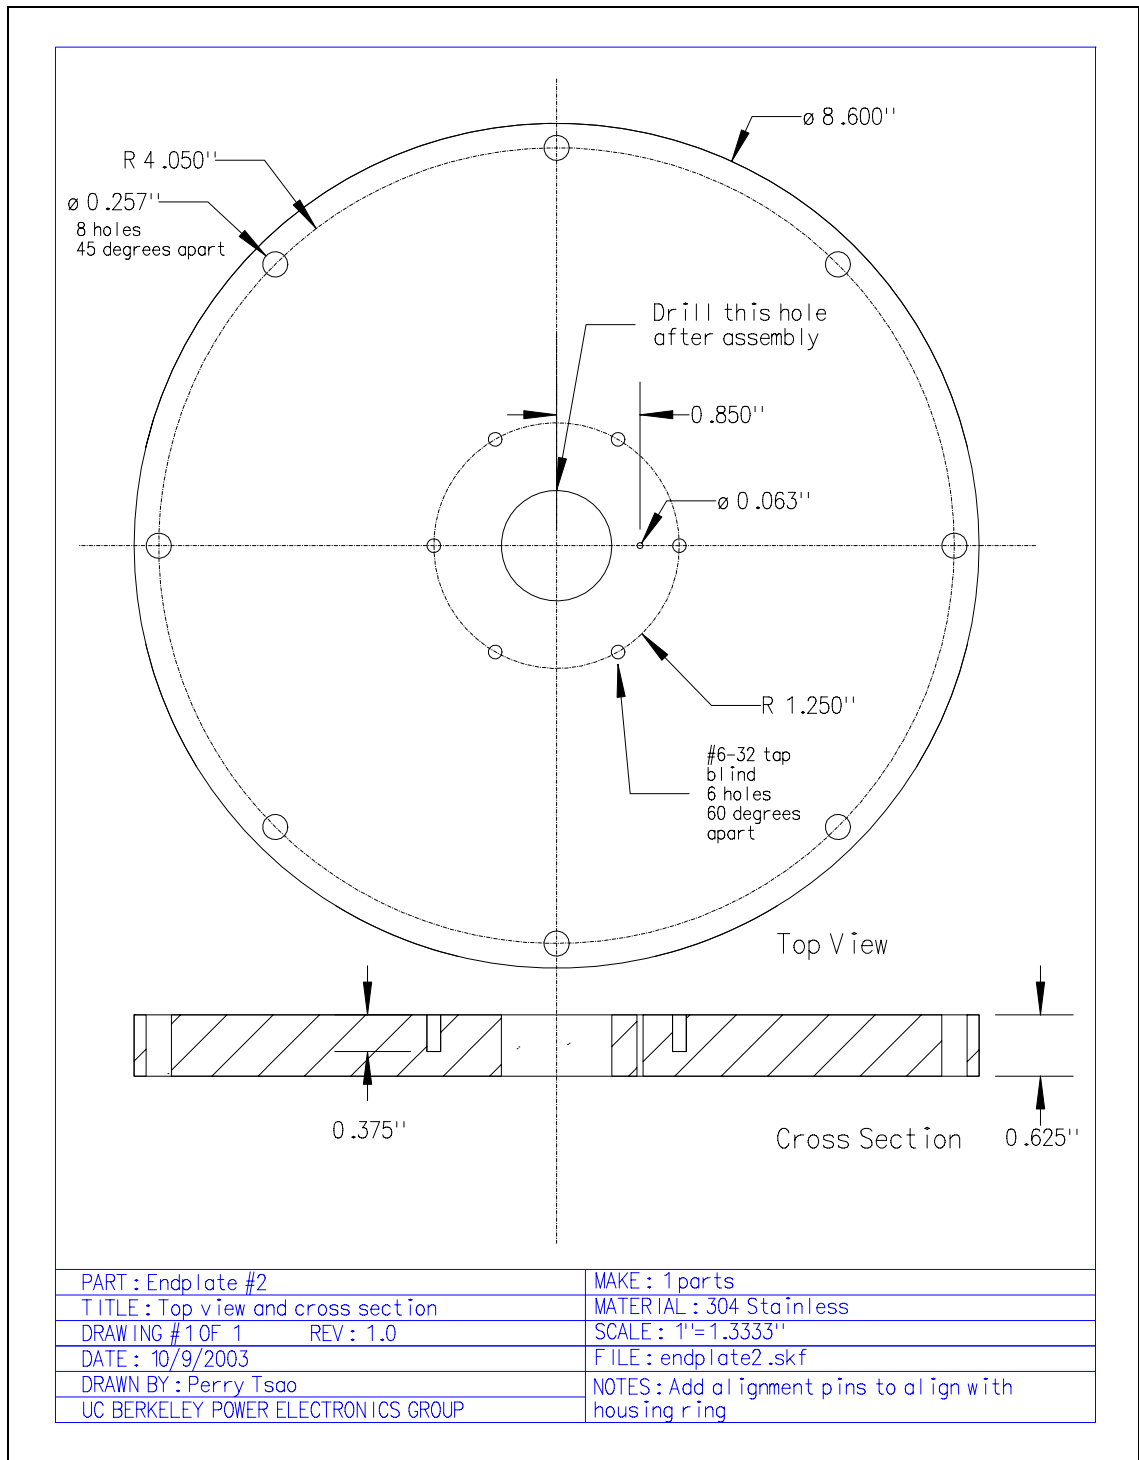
Drawing of modifications made to endplate #2. These modifications were made to allow the mounting of a retainer for the tolerance ring.
